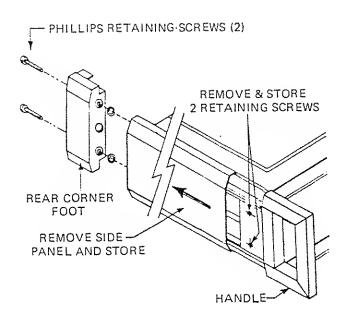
Rear Corner Foot, Side Panel, and Handle Detail
